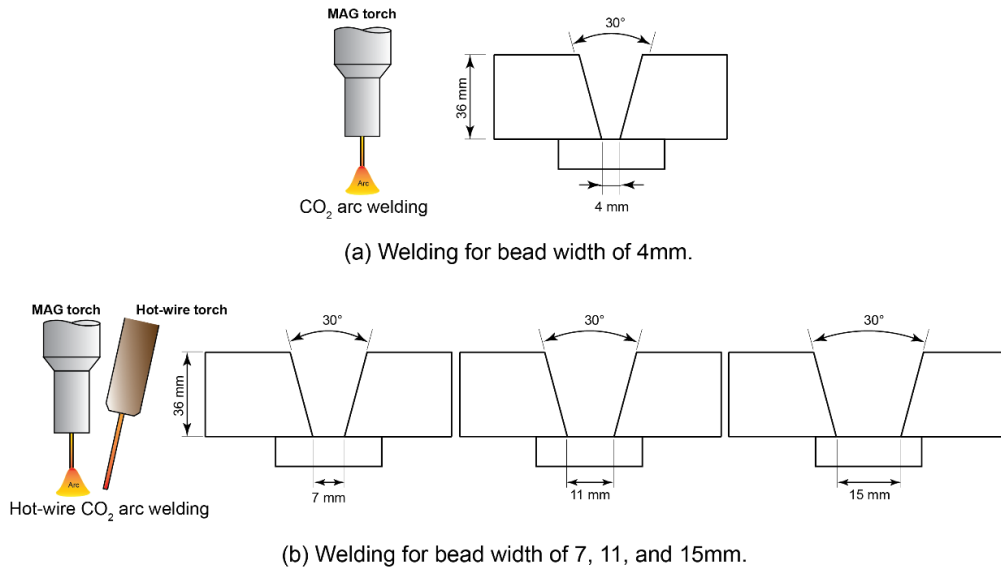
Combinations of welding process and groove shape.
